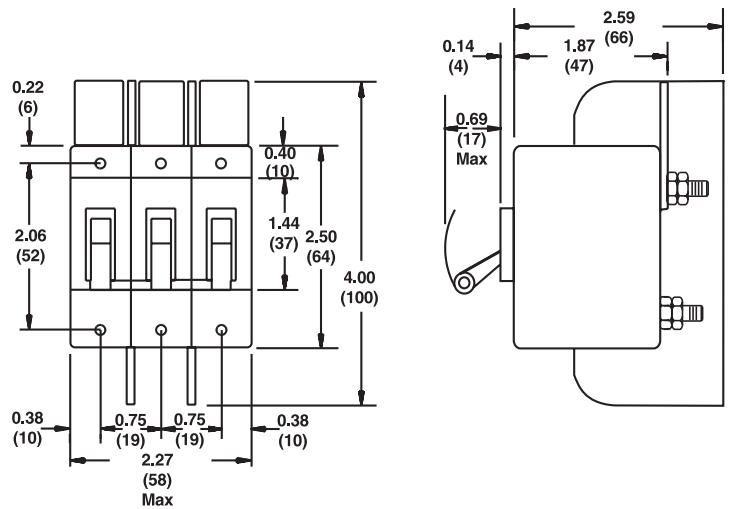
OPTIONAL CIRCUIT BREAKER OUTLINE DRAWING
